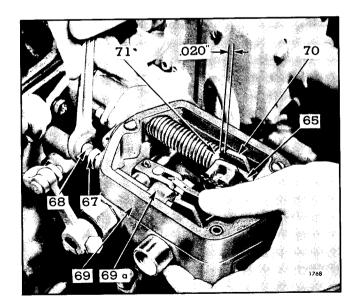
Setting Maximum Fuel Adjusting Screw (Load Limit)
